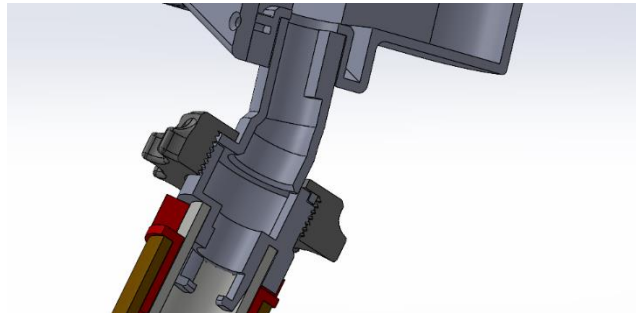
Quick-detach mechanism cutaway illustrating screw-on captive nut and threaded end cap.
